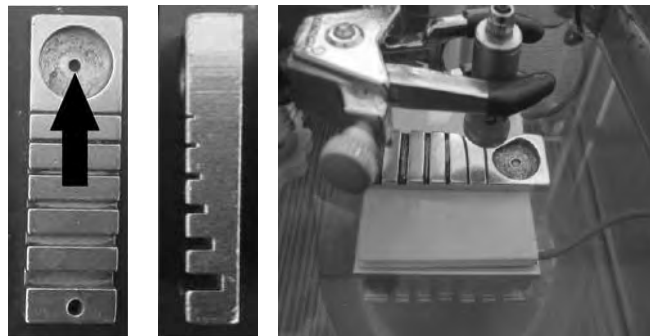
Front and side view of penetrameter, flat bottom holes and transducer
